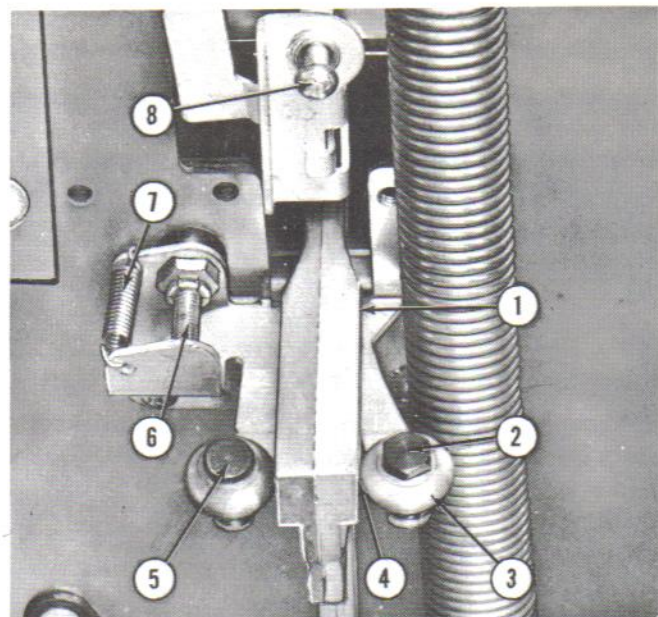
LIFT ARM ADJUSTMENT, 2500
